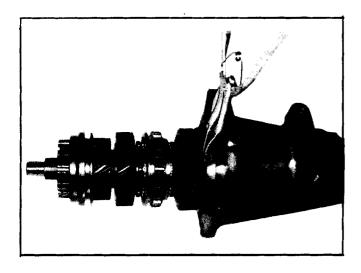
C-9 Expanding Snap Ring in Extension Housing
